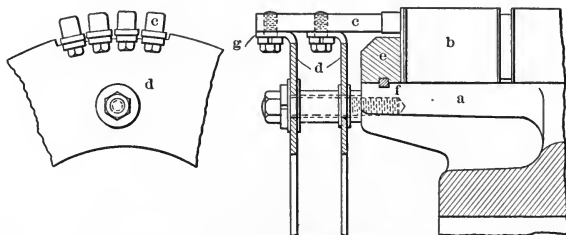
Squirrel-cage Rotor, Crocker-Wheeler Induction Motor.
